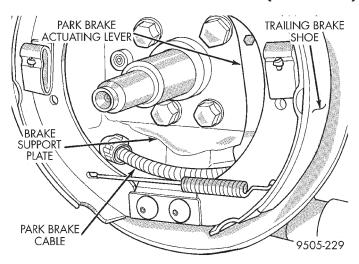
Park Brake Cable Attachment To Actuating Lever
